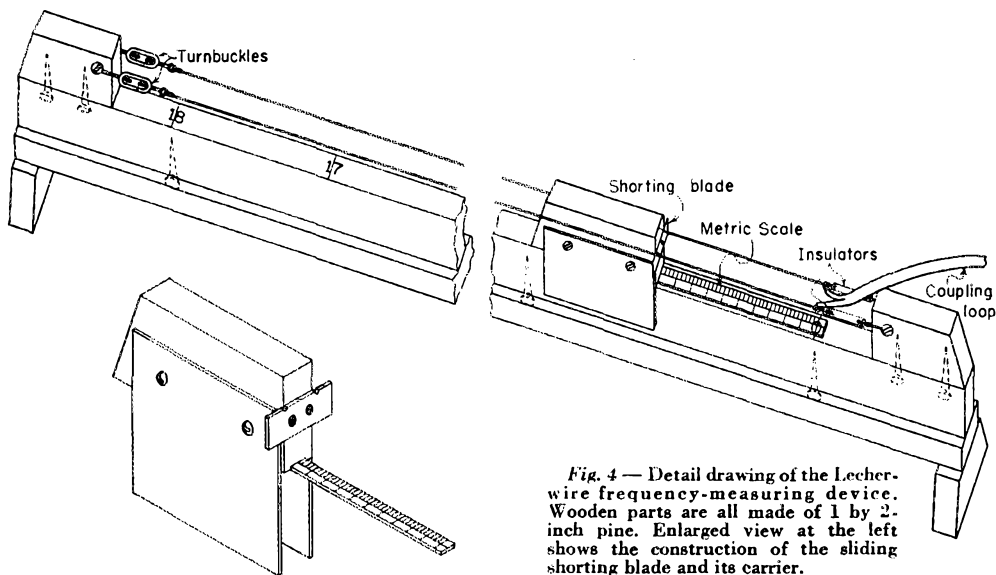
Detail drawing of the Lecher-wire frequency-measuring device. Wooden parts are all made of 1 by 2-inch pine. Enlarged view at the left shows the construction of the sliding shorting blade and its carrier.
